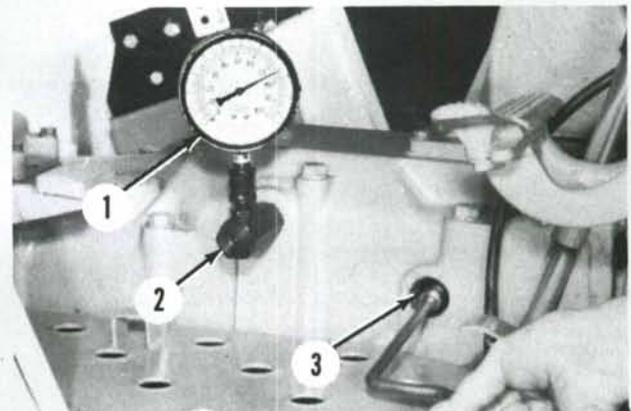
View showing installation of pressure gage (1) using adapter CAS-1242 (2) in control valve test port for adjusting planetary brake bands. Adjustment screw (3) for front brake band is shown.
